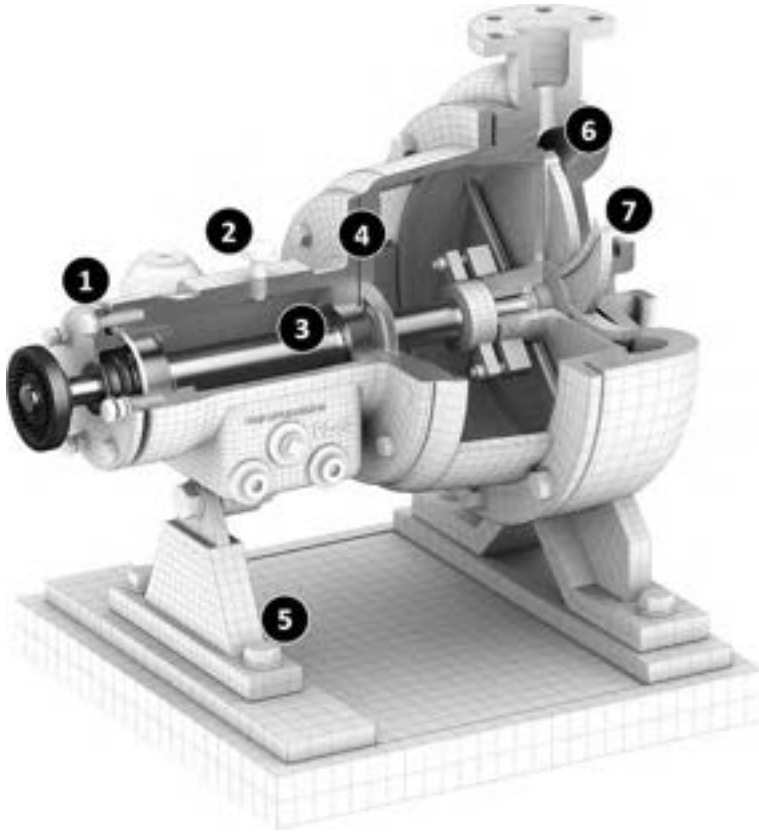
Common engineering adhesive maintenance and repair applications for a centrifugal pump: (1) threadlocking of bearing housing fasteners; (2) thread sealing of oil plug; (3) retaining of bearings; (4) gasketing of pump flanges; (5) threadlocking of mounting bolts; (6) rebuild and protection of pump casing; (7) rebuild and protection of impeller.
